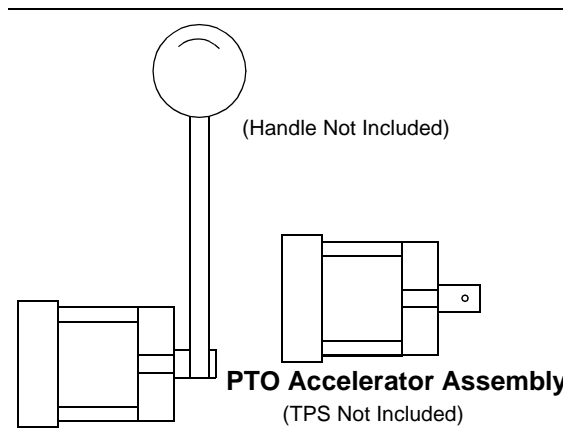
Remote Accelerator Pedal/Accelerator Assembly
